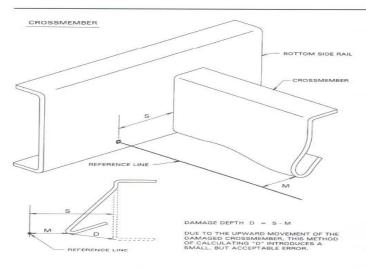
/Measuring damage to crossmember when bent in two locations (web and flange sides). See Section 4.8.4.
